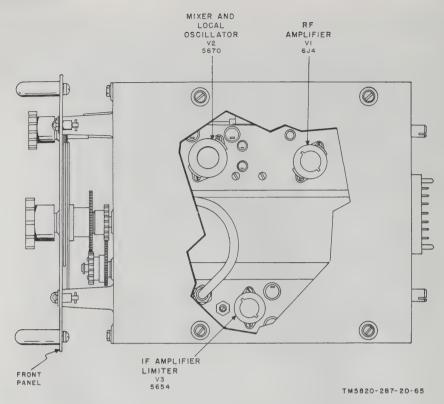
AM-1179/GRC (A-band), tube locations, bottom view.
